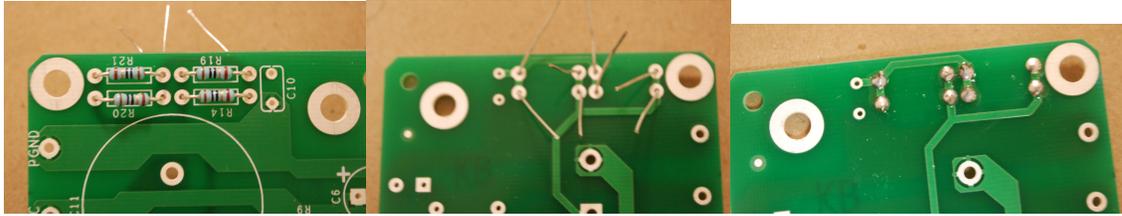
First four resistors are installed, leads bent on the back side, soldered, then clipped. When you have completed this section, there will only be one empty resistor slot, R16, a no-load, which will remain empty.
